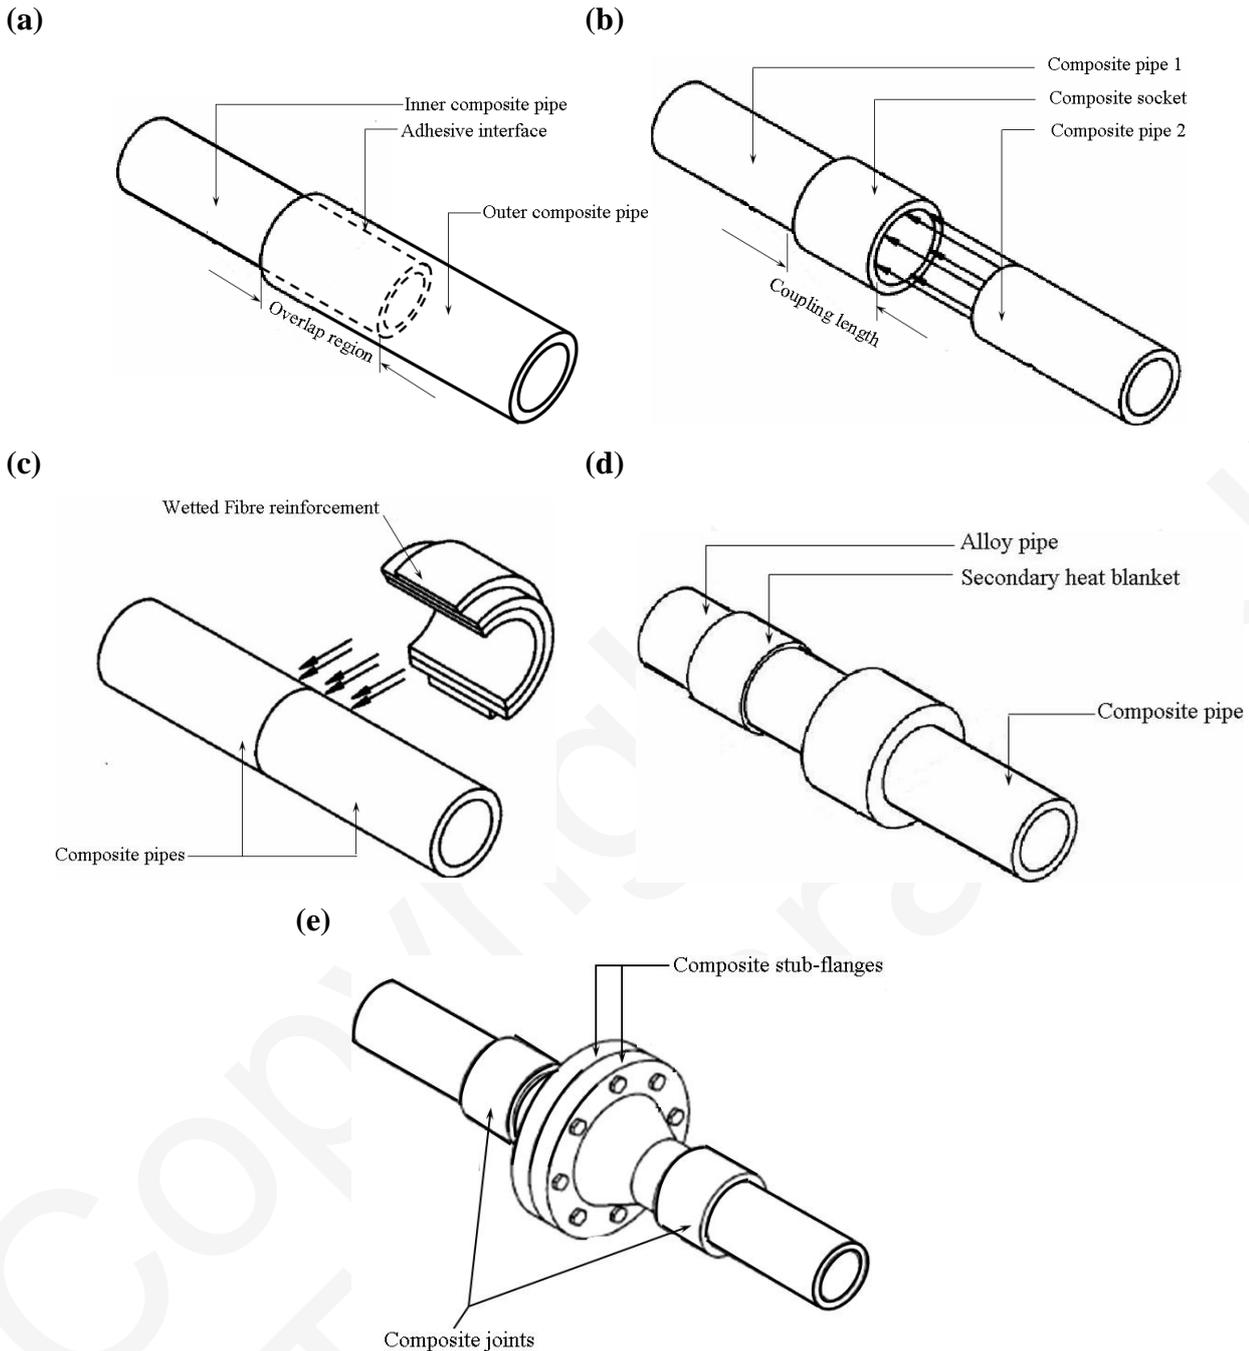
Different types of joining methods used in the composite piping systems: (a) Single lap joint, (b) Socket joint, (c) Butt-and-strap joint, (d) Heat-activated coupling joint, and (e) Flanged joint.
